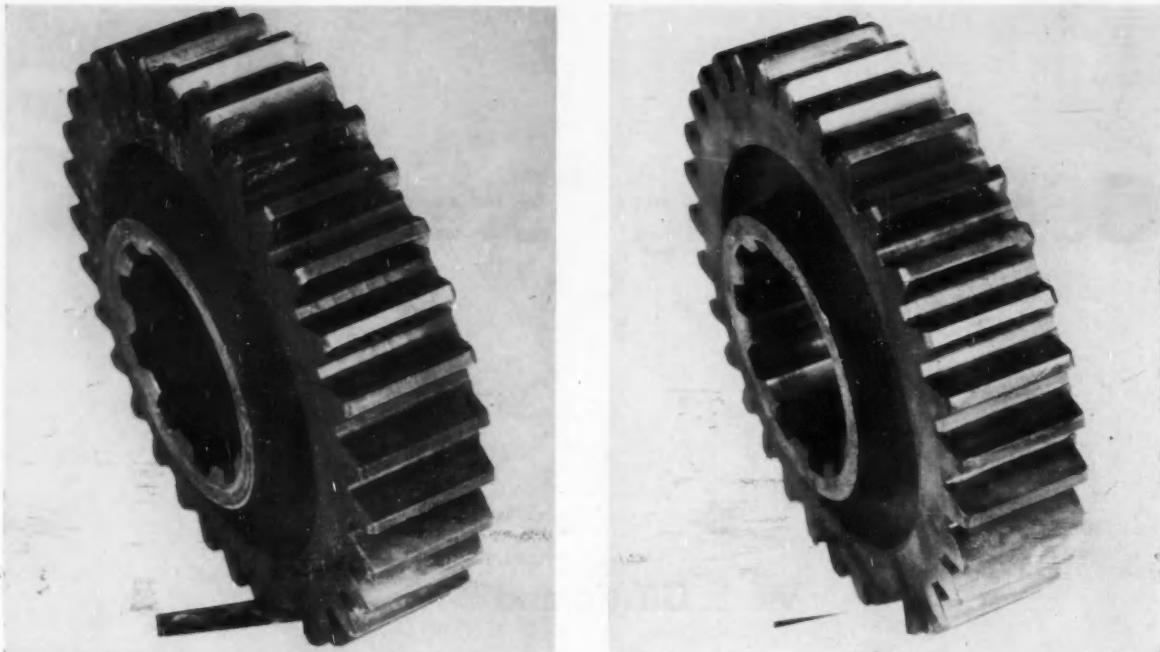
Medium-sized speed-change gears of induction-hardened SAE 1050 steel pit faster than carburized and induction-hardened SAE 1022 ones. The "1050" gear above (left) was operated three million cycles at a load of 70 hp. The "1022" gear (right) was still in good condition after five million cycles at 85 hp
